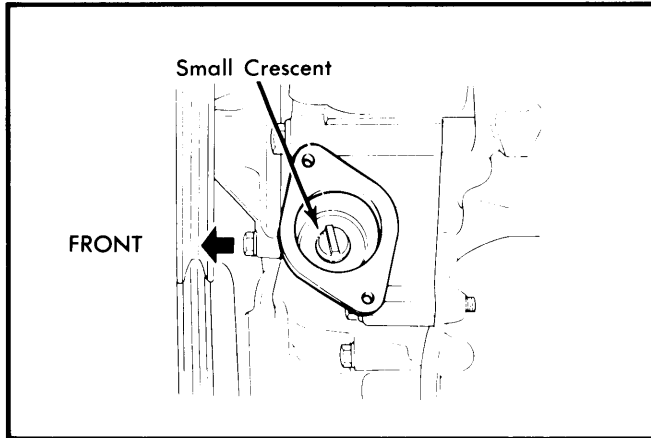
Position of Distributor and Oil Pump Drive in Engine
